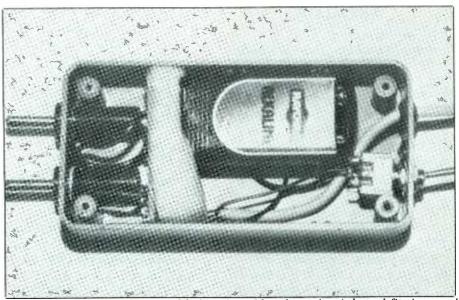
Interior view of assembled project. Note how circuit board fits into and is held in place by molded guide rails on both sides. Battery is held in place with foam plastic or optional battery clip.
